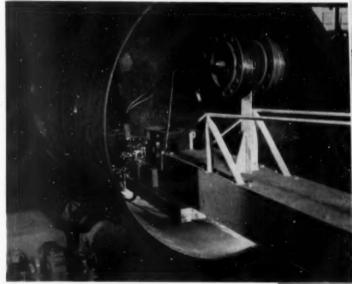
(below) Close-up of the head, along with control units, supported on an adjustable extension of the boom. Power cable and vacuum hose for picking up unfused flux, extend through the hollow boom.
